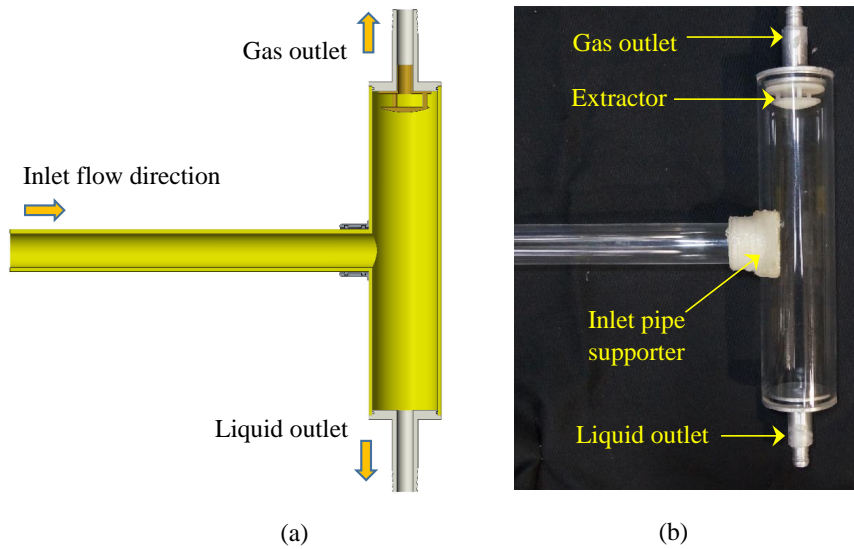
Configuration of VFT-V5-EXR: (a) section view from 3d model, (b) photograph of the assembly.
